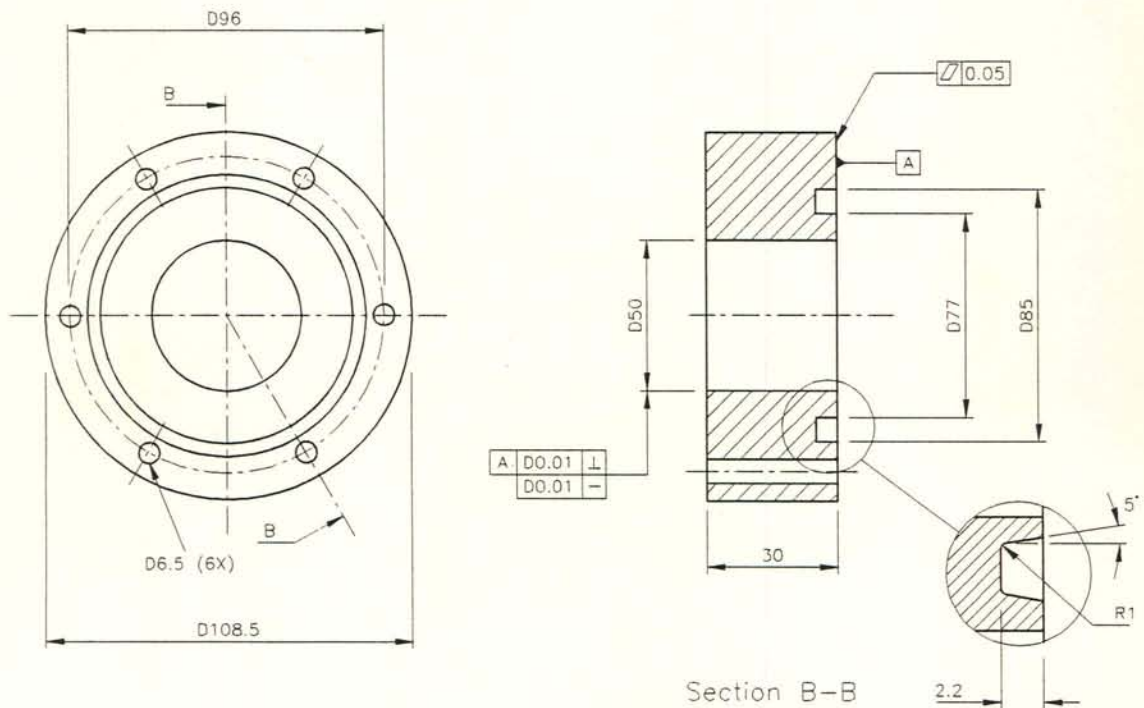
(c): Orifice 2 pipe flange: Detail drawing.
